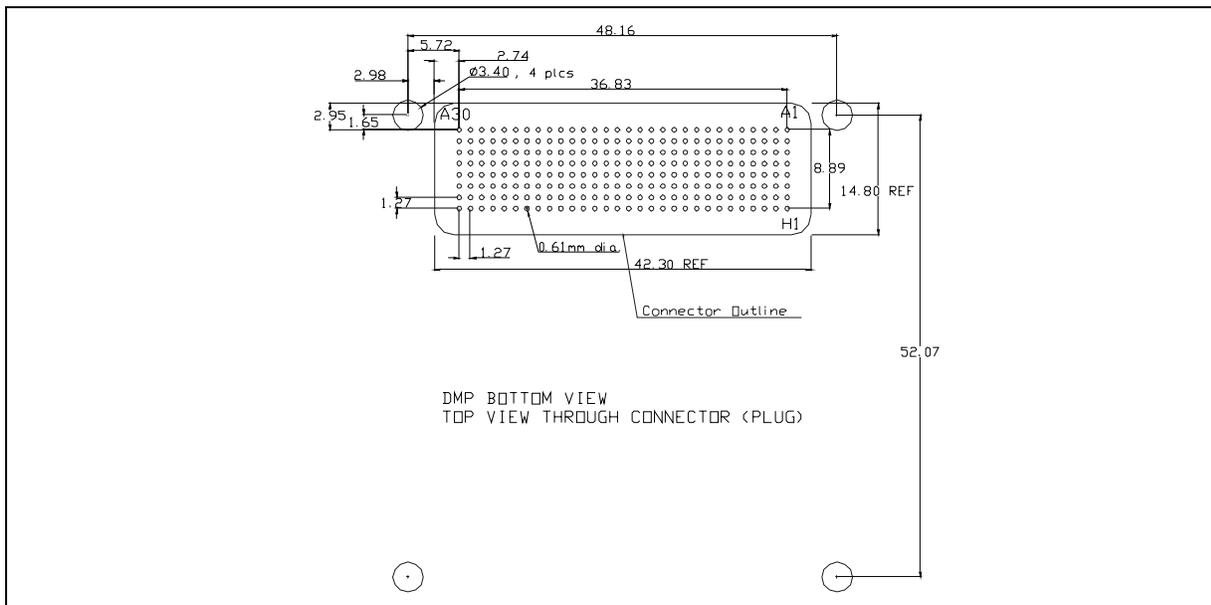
240-Position Connector Footprint (Dimensions in mm)
